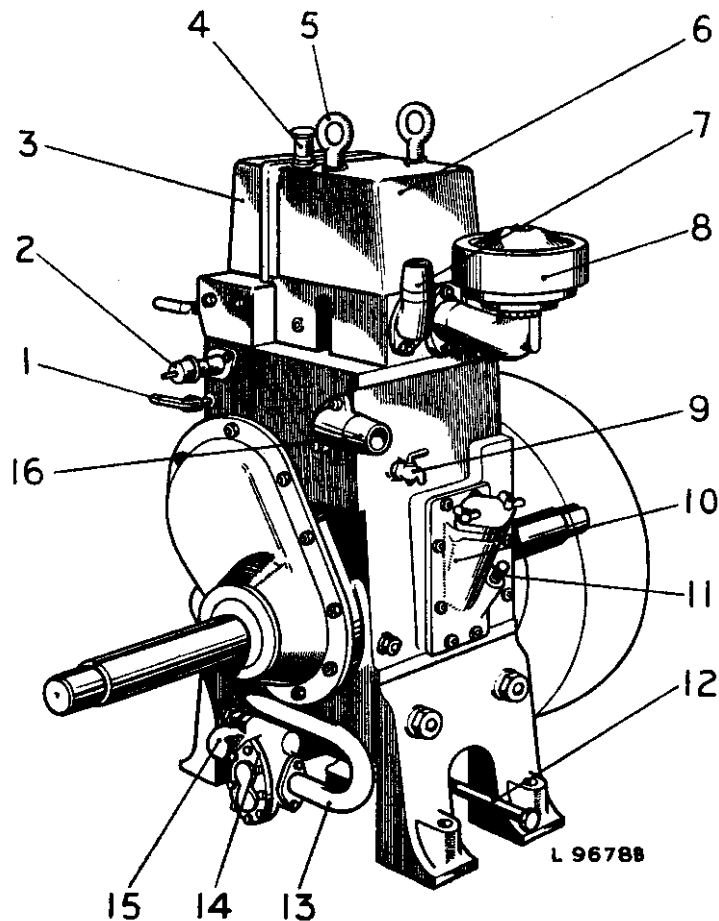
Single Cylinder Engine (opposite Camshaft side)
